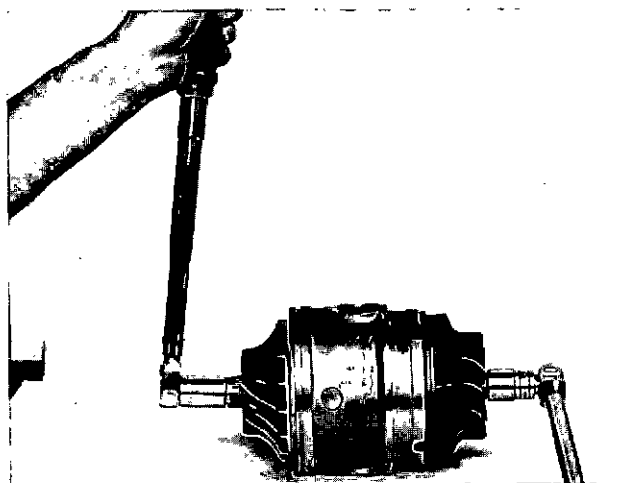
, (T465088). Torque the rotor nut on the rotor
